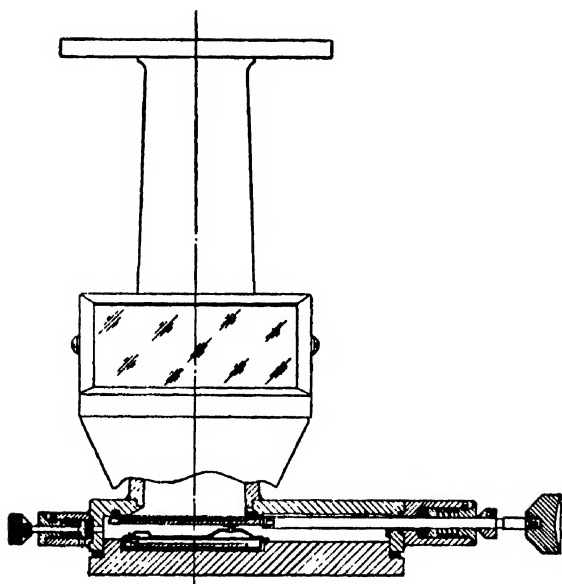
Cross section showing the sliding valve of the photographic chamber. The knob on the right is the activating means. The knob on the left admits air to the photographic chamber to permit opening the chamber door.
